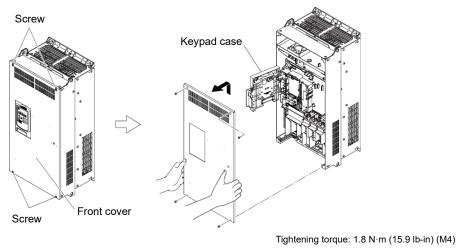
Removal of front cover and wiring guide (for FRN0059G2S-2G)
